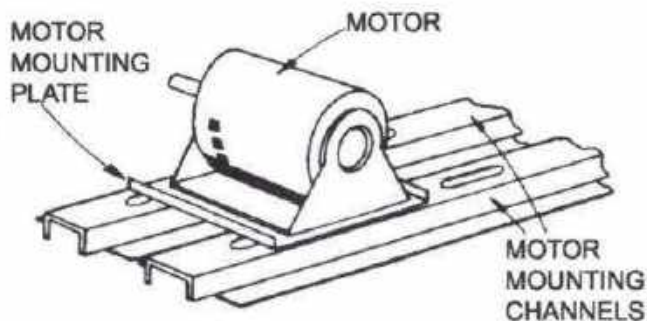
Typical Motor Mounting Assembly and Motor - NE240
